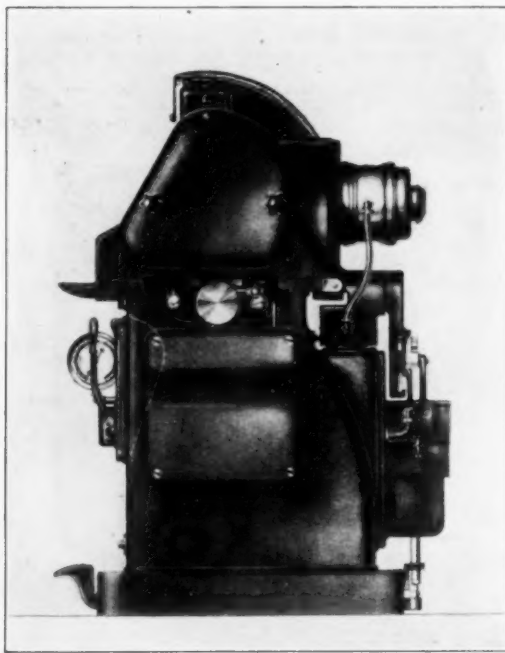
HORIZONTAL DUPLEX SEMI-AUTOMATIC DRILLING MACHINE, END VIEW
